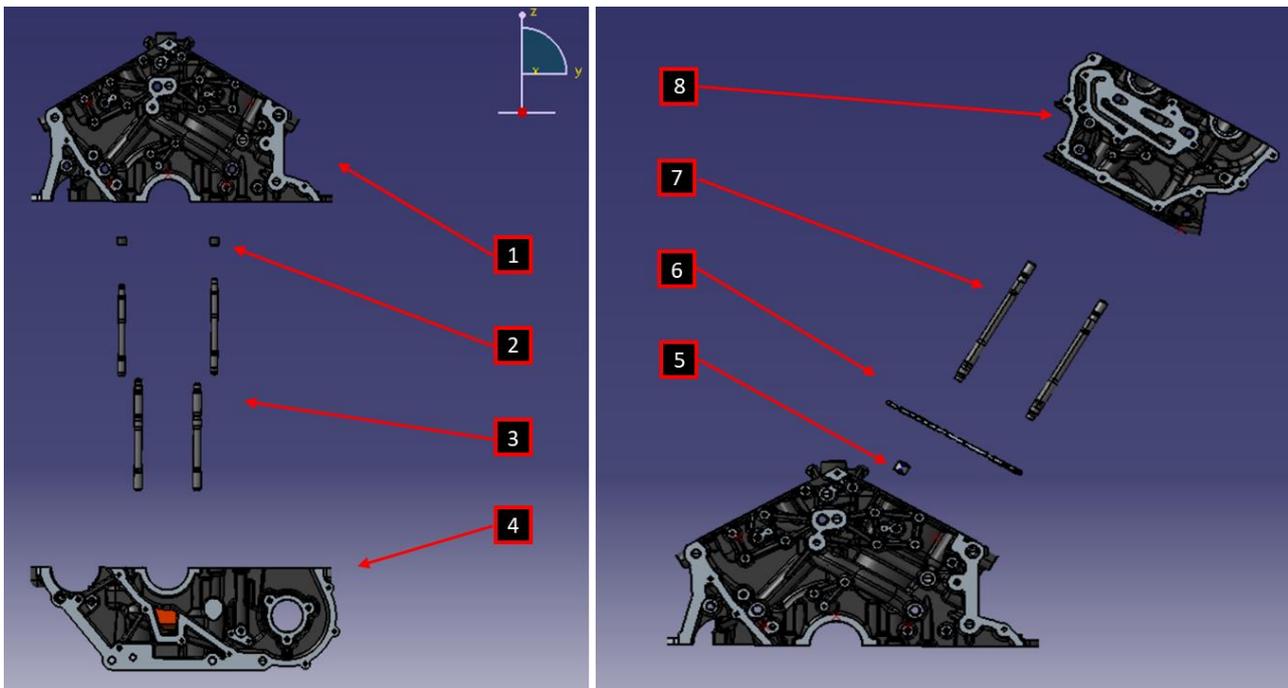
V12 engine assembly: 1. UC, 2. LC bushings, 3. LC studs, 4. LC, 5. Cylinder head bushings, 6. Head gasket, 7. Cylinder head studs, 8. Cylinder head
